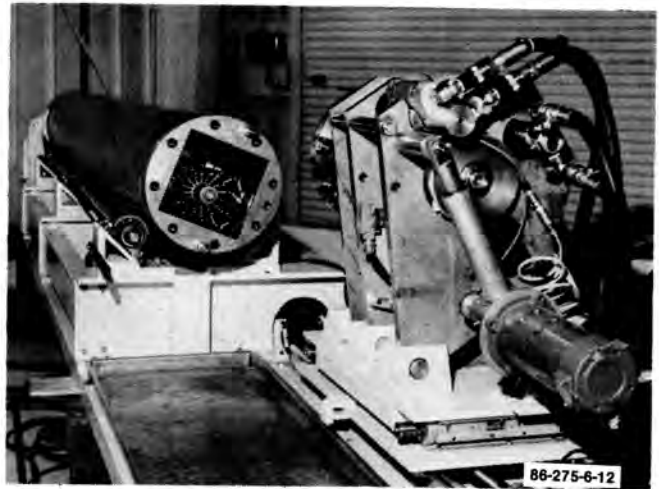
Head Removal Machine in the retracted position. A canister is shown resting on the rotator. A simulated core component is positioned in the canister opening.
